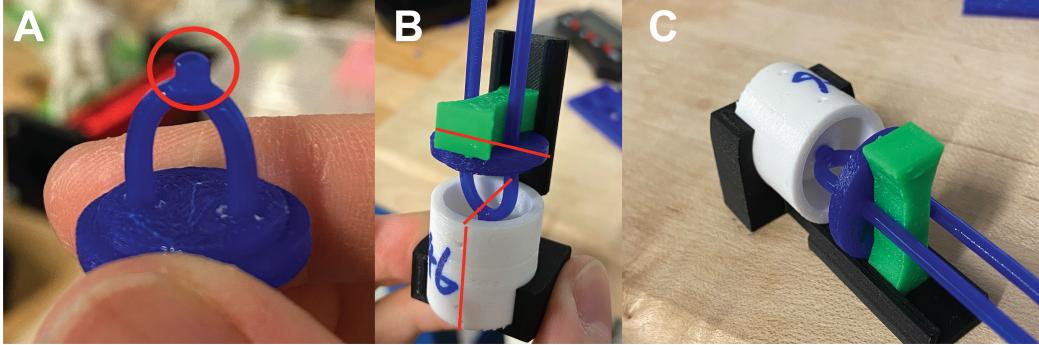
Top tube assembly process. A) Application of glue to the spacer on the top tubing. B) Utilization of 3D-printed tool to ensure tube's perpendicular alignment. C) Exertion of slight pressure for secure attachment of spacer to membrane.
